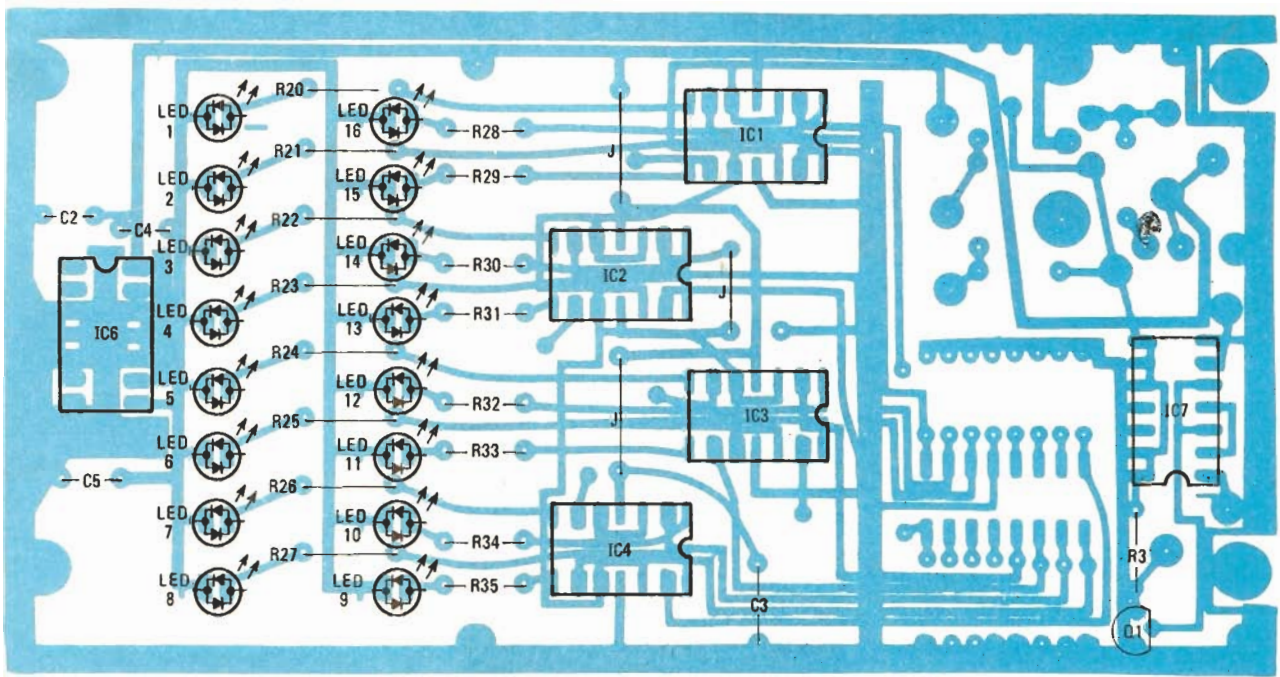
PARTS PLACEMENT on "component-side" of display board. Note that foil pattern shown is on side of board *opposite* the one on which components are mounted.
